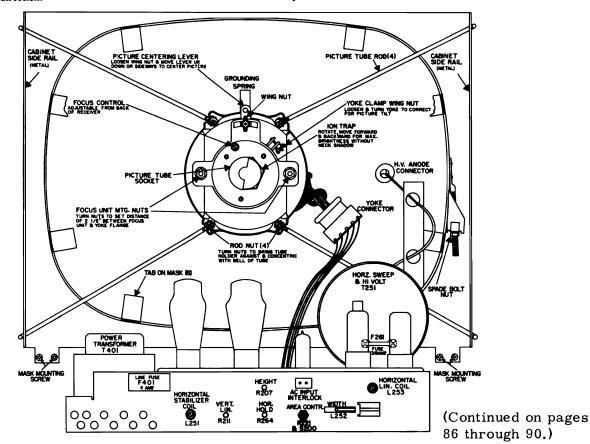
Chassis and Picture Tube Assembly (Rear View)
